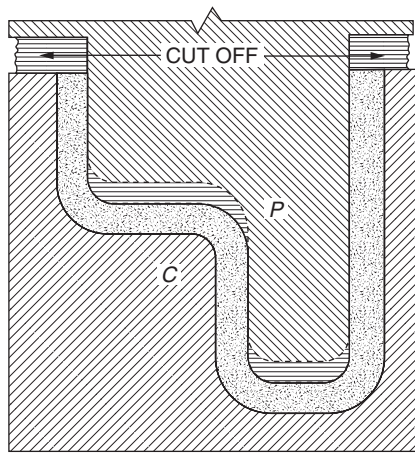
Tolerances on the dimensions of moulded parts vary, depending upon how the mould is made and how the part is moulded. It is assumed that the part shown here was made from a mould.
